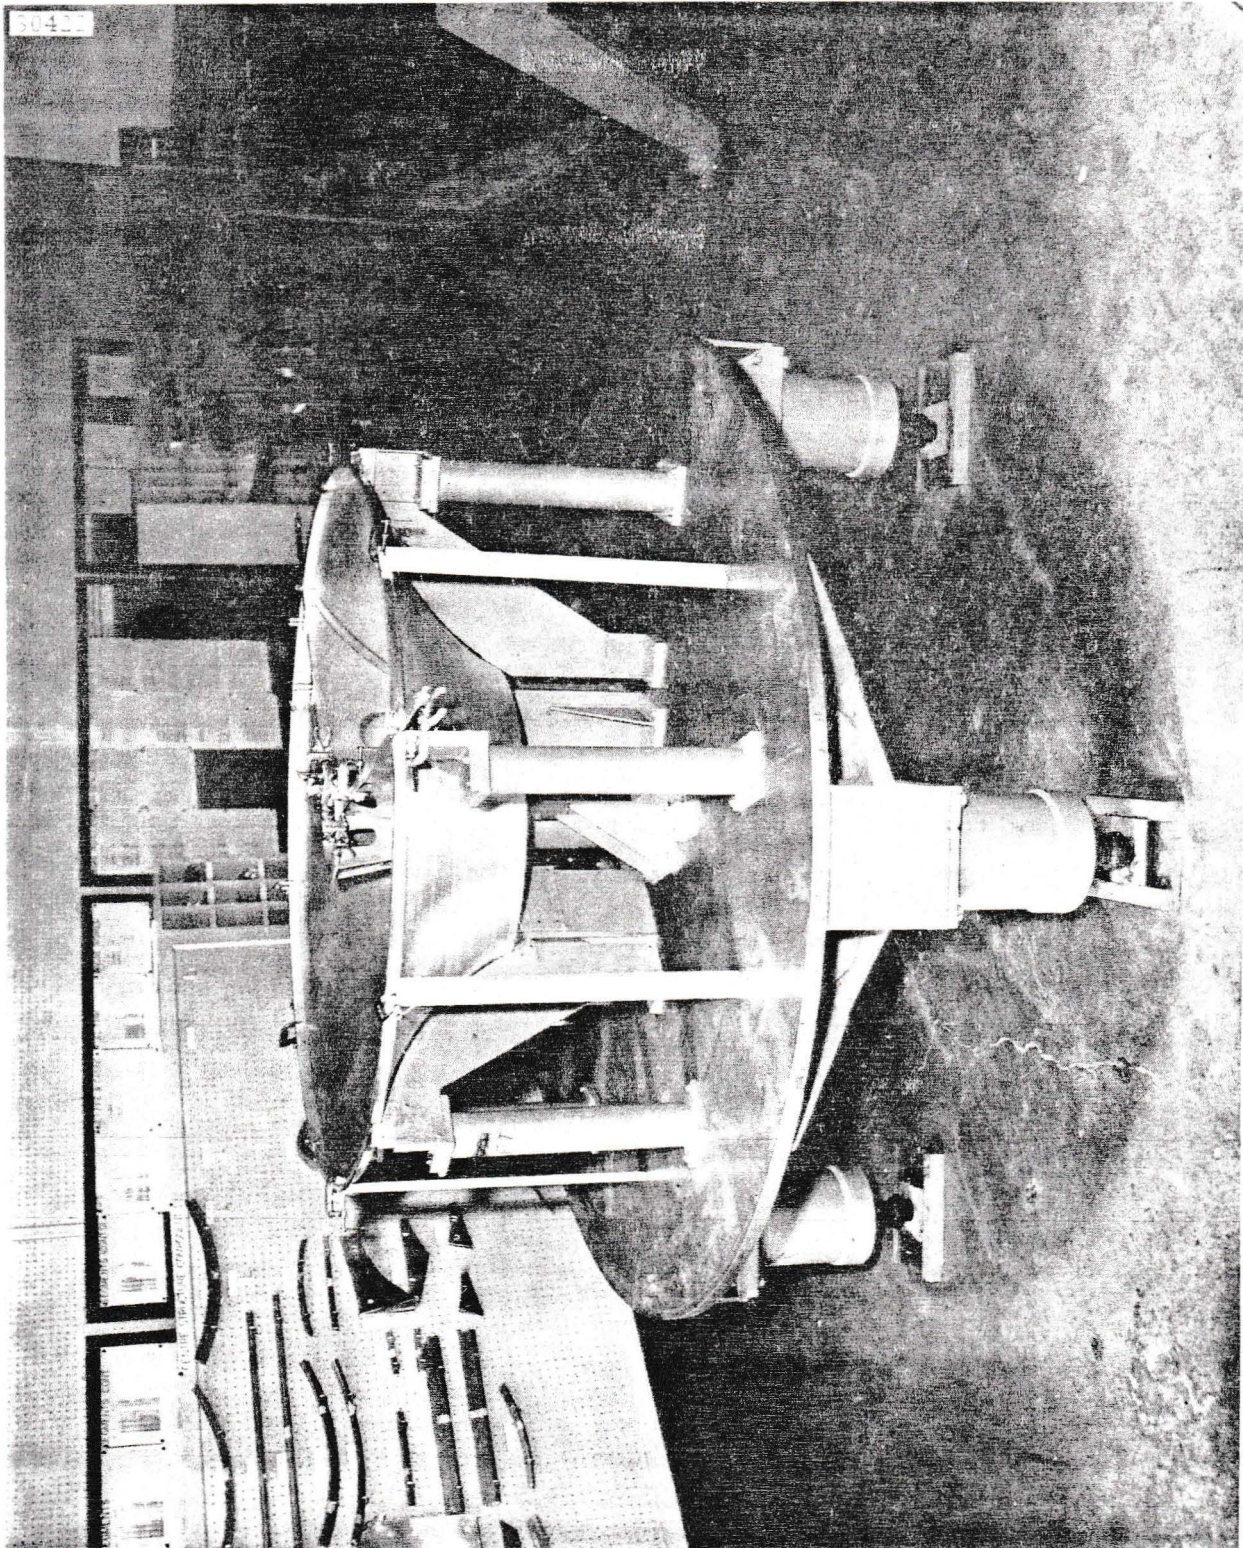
CENTRE STRUCTURE SPINNING CLAMPED IN CENTRE STRUCTURE ASSEMBLY JIG
